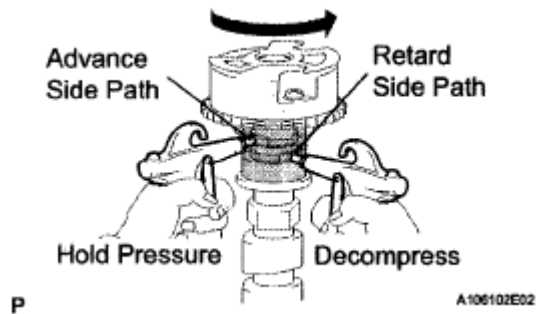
Checking Camshaft Timing Gear Revolves In Advance Direction
